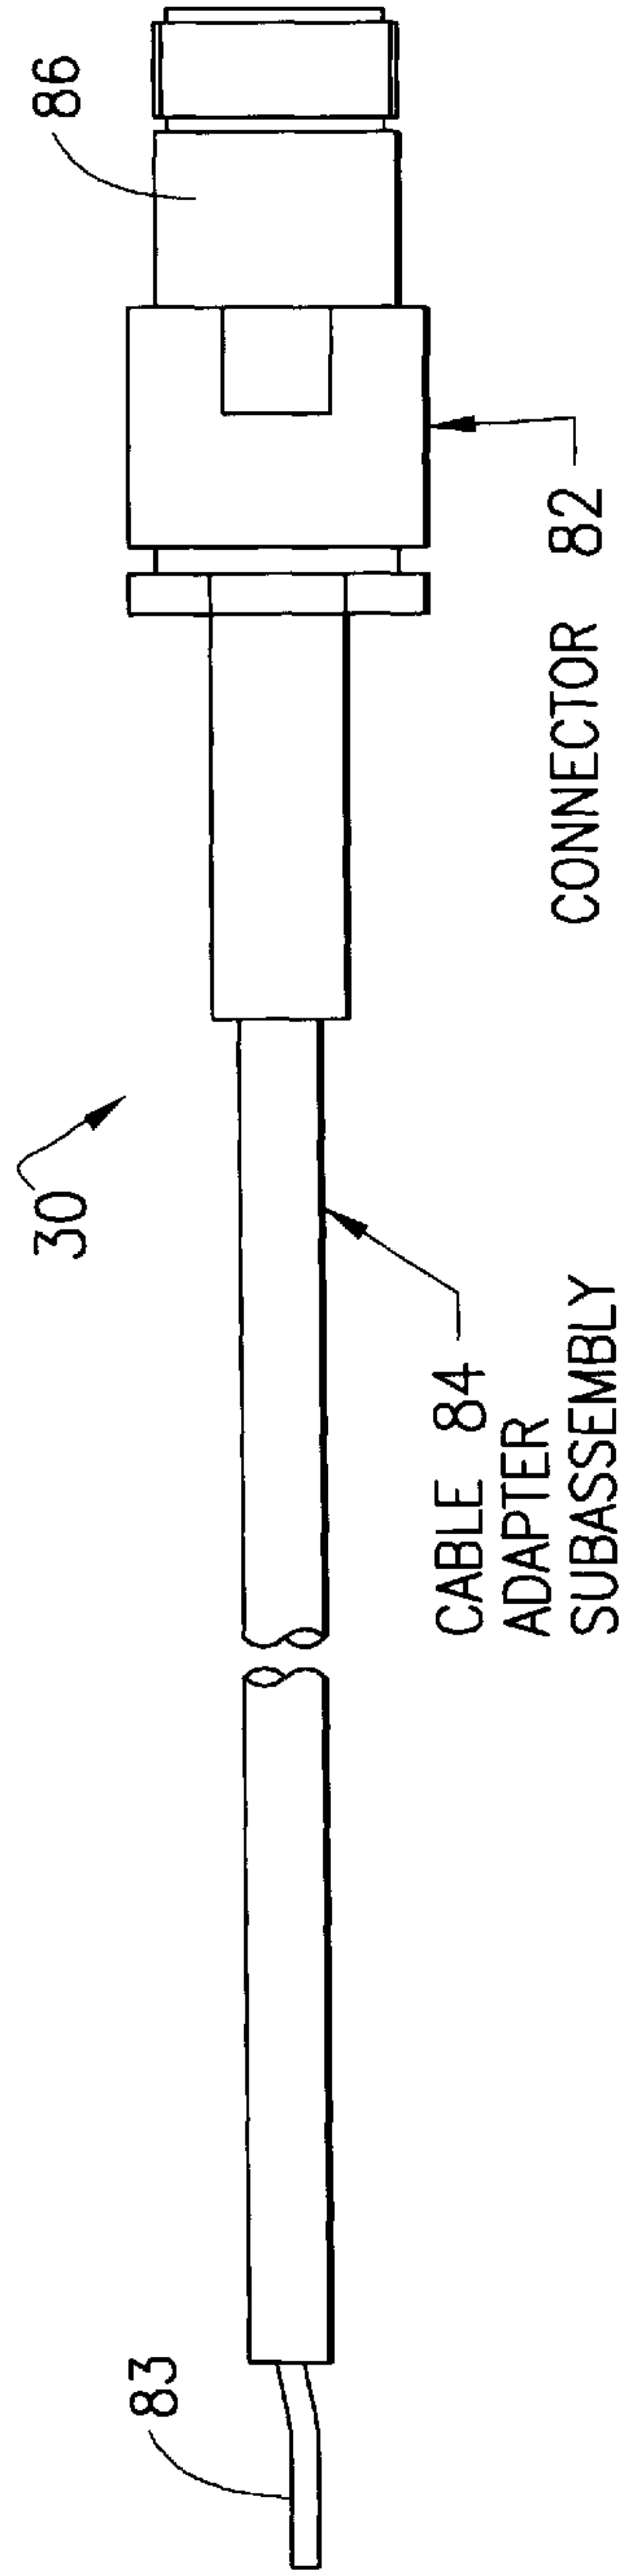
(CABLE CONNECTOR ASSEMBLY)
